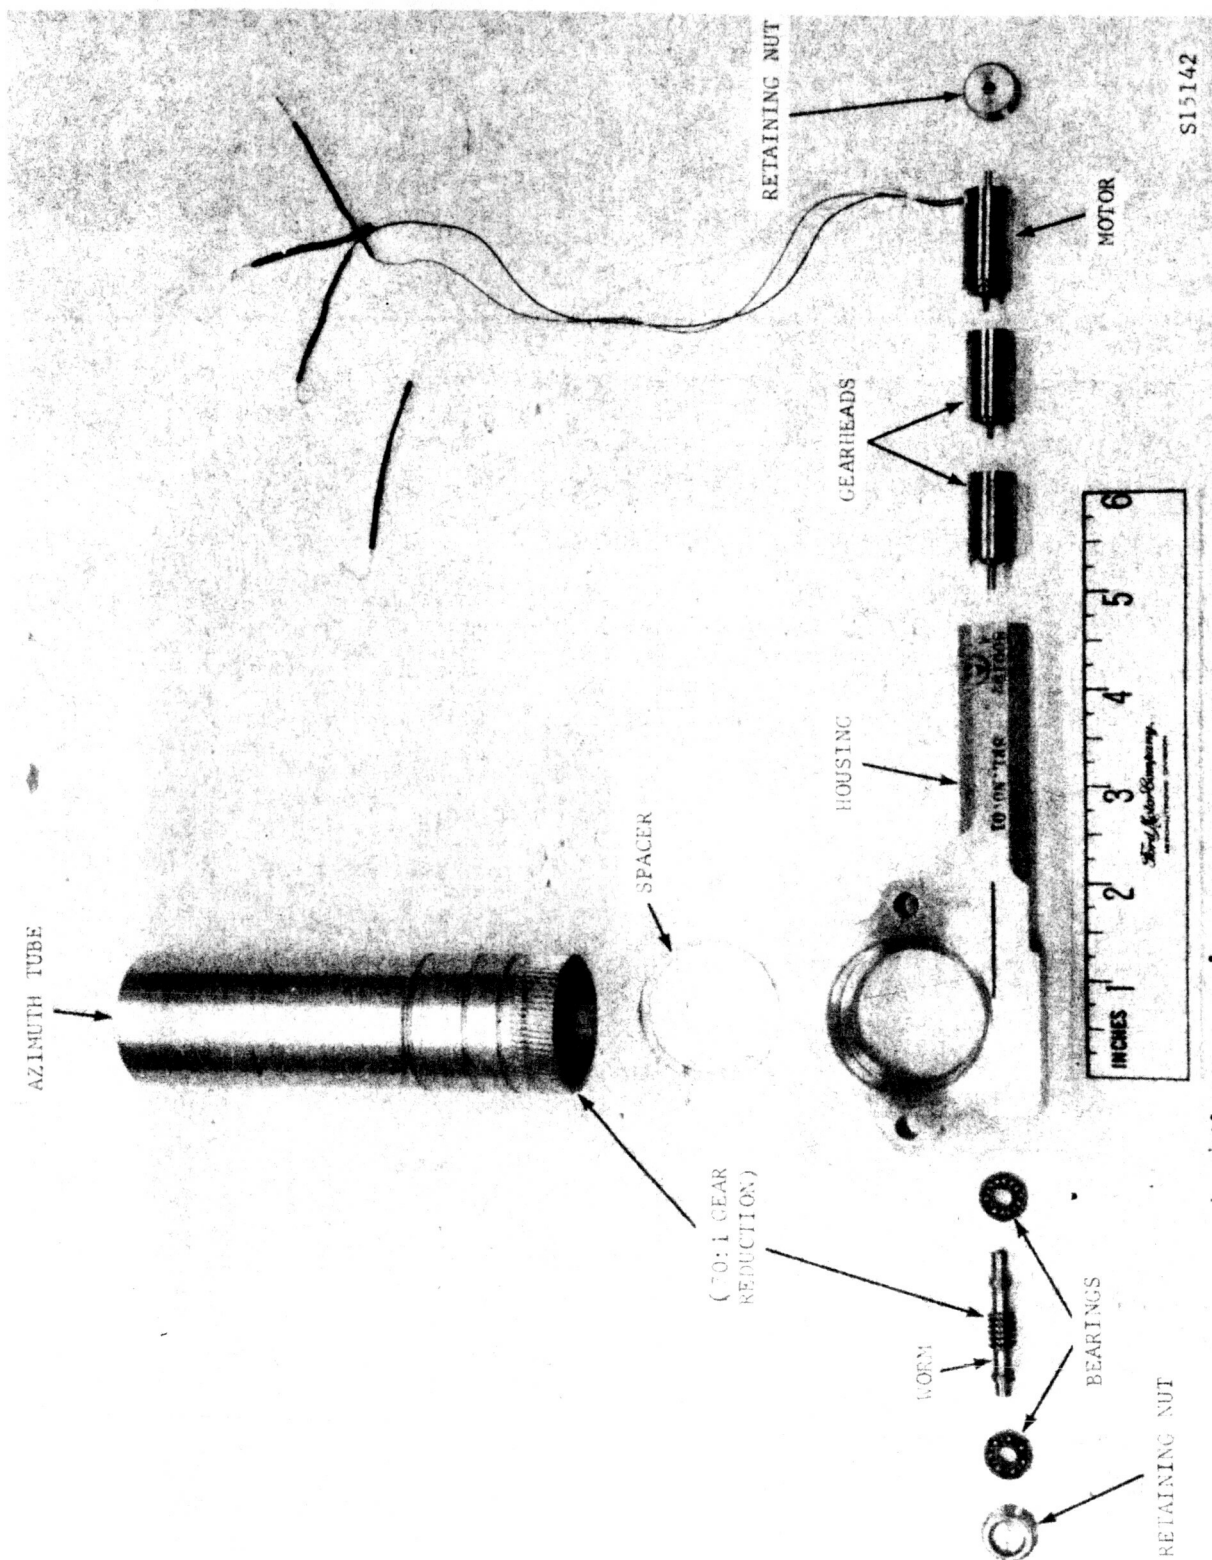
EXPLODED VIEW OF AZIMUTH DRIVE MECHANISM
